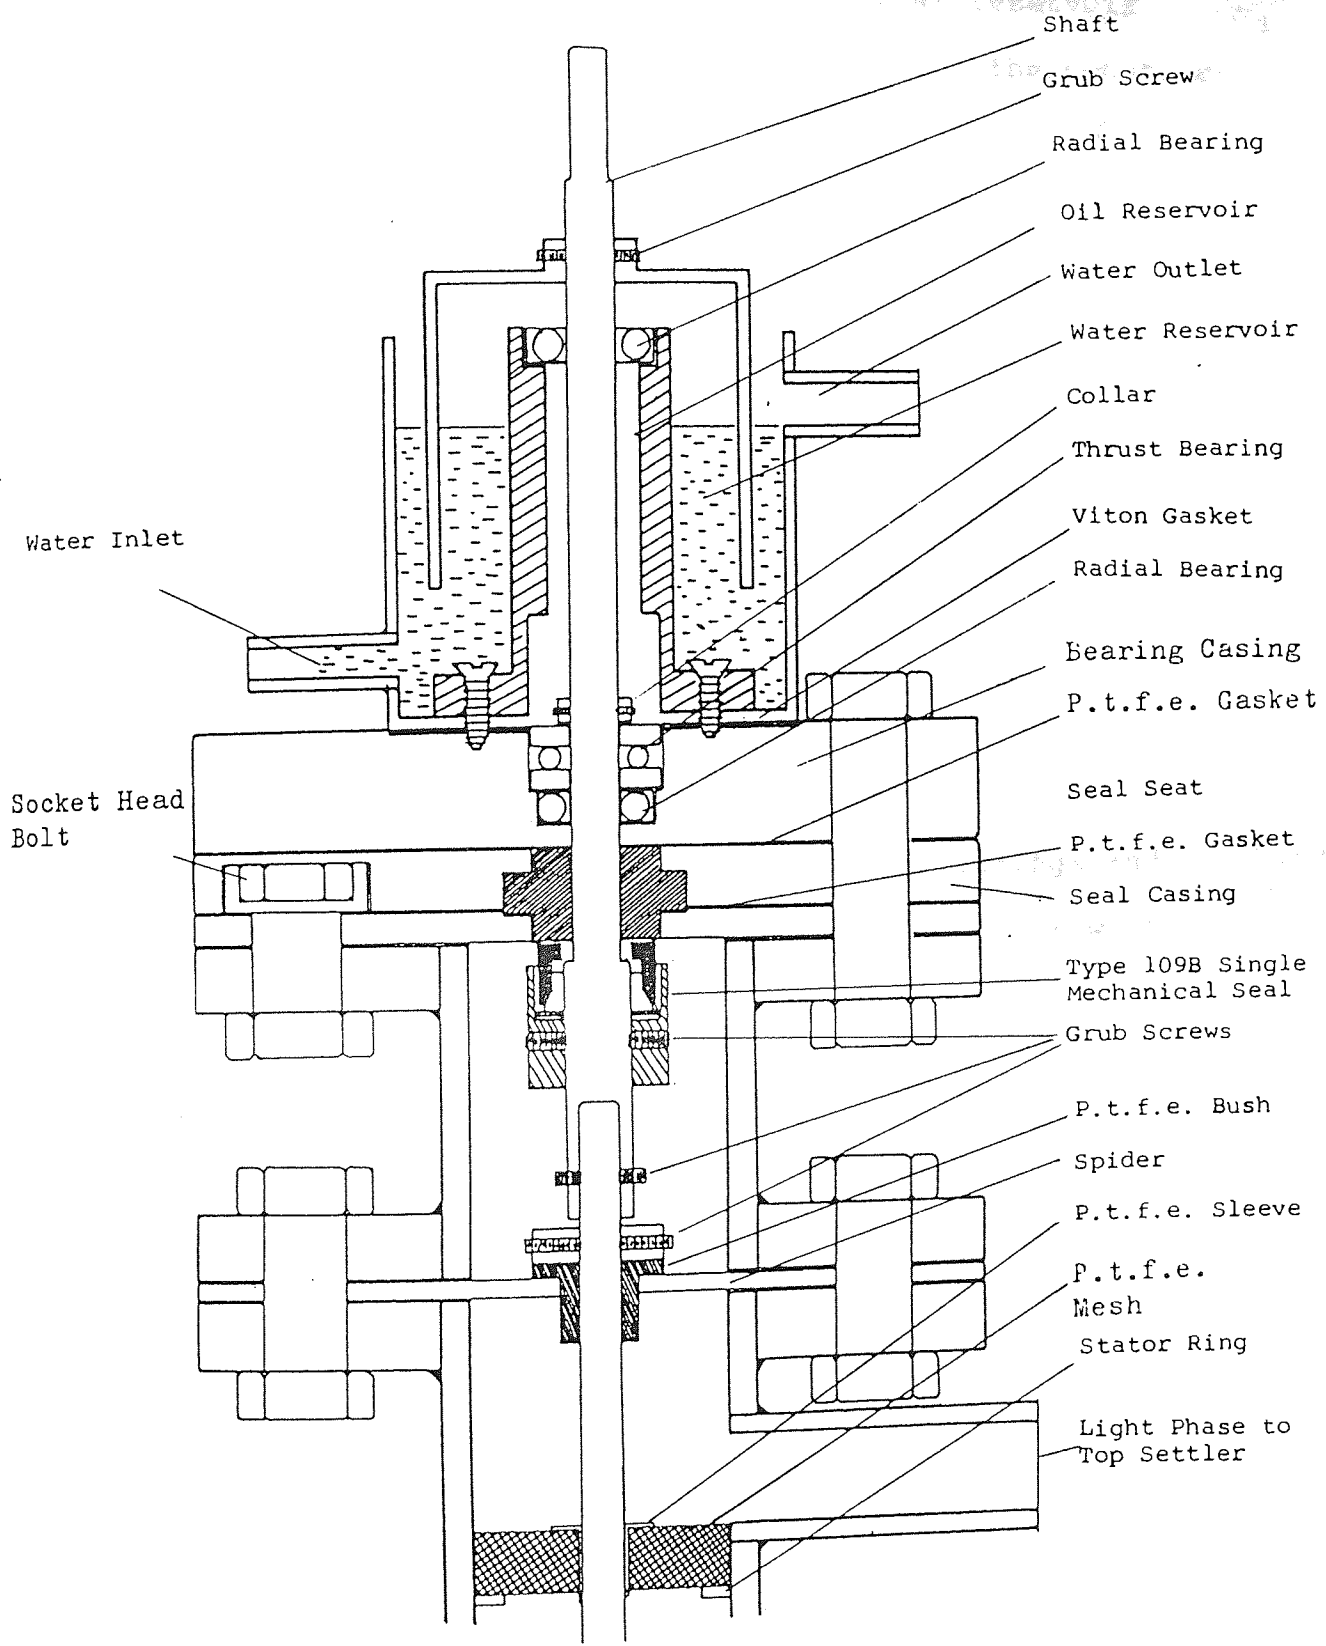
CONSTRUCTIONAL DETAILS OF TOP OF COLUMN.
